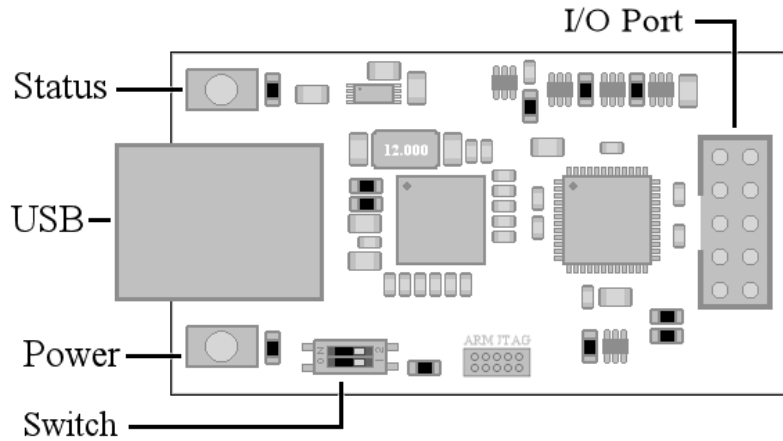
Professional PCB 4.0 Shown, PCB 5.0 is similar.
